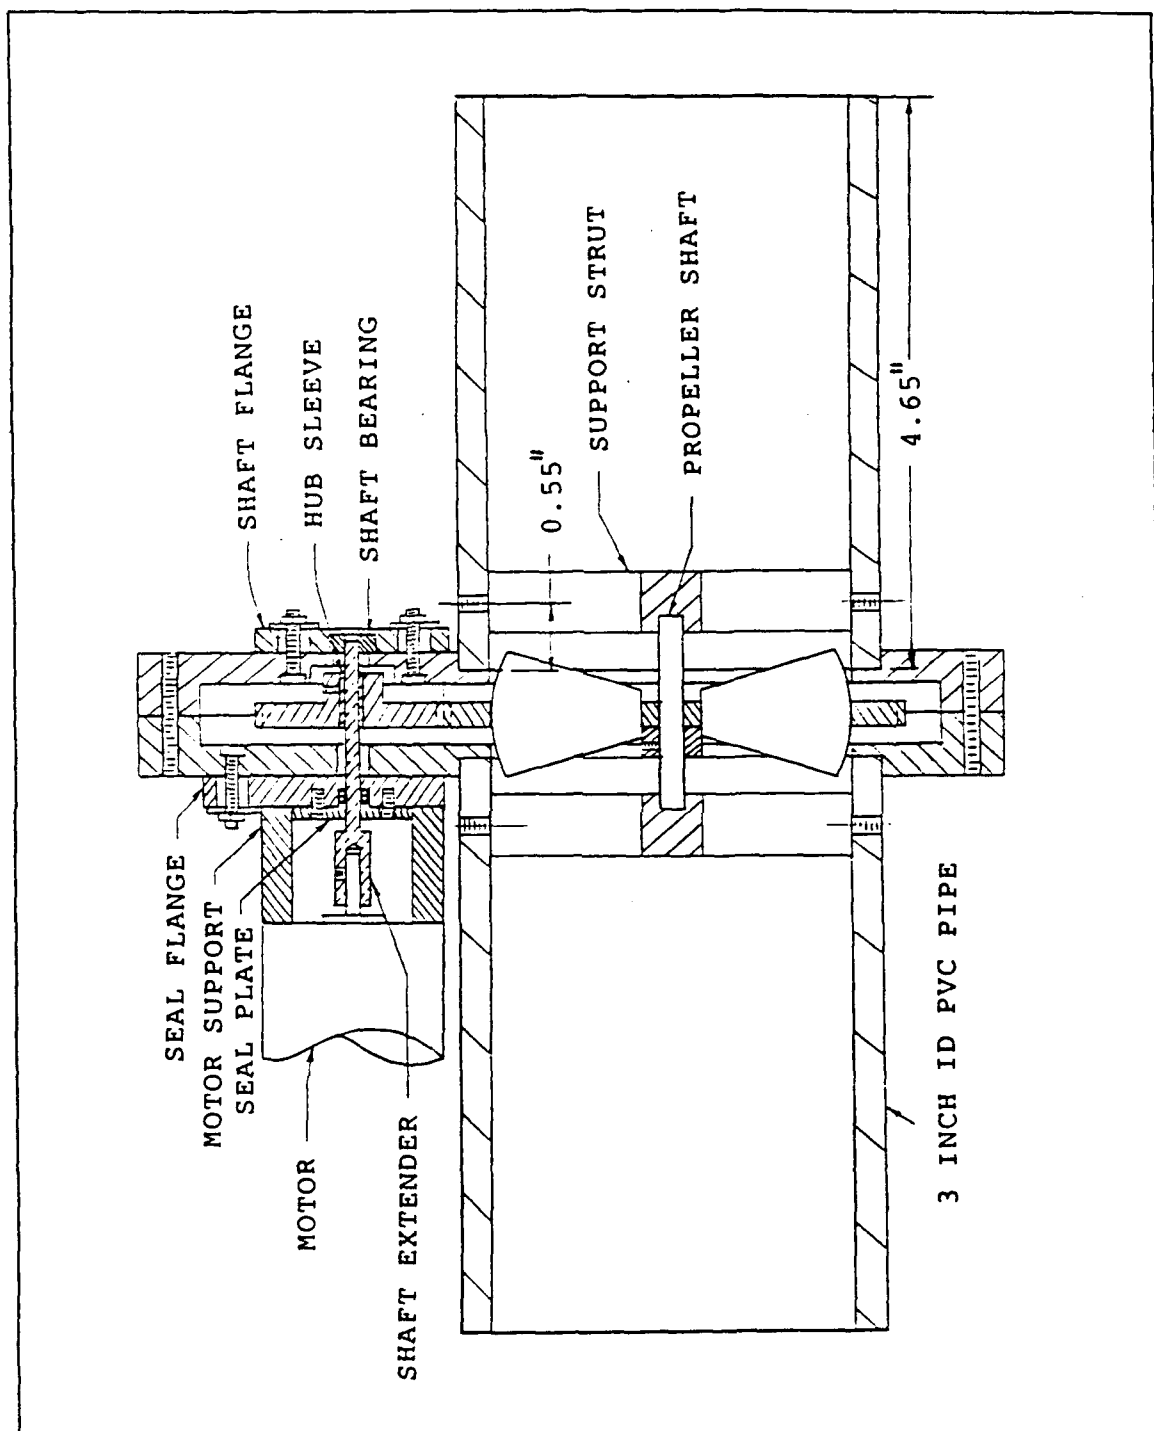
Cross-Sectional Drawing of Thruster Assembly
